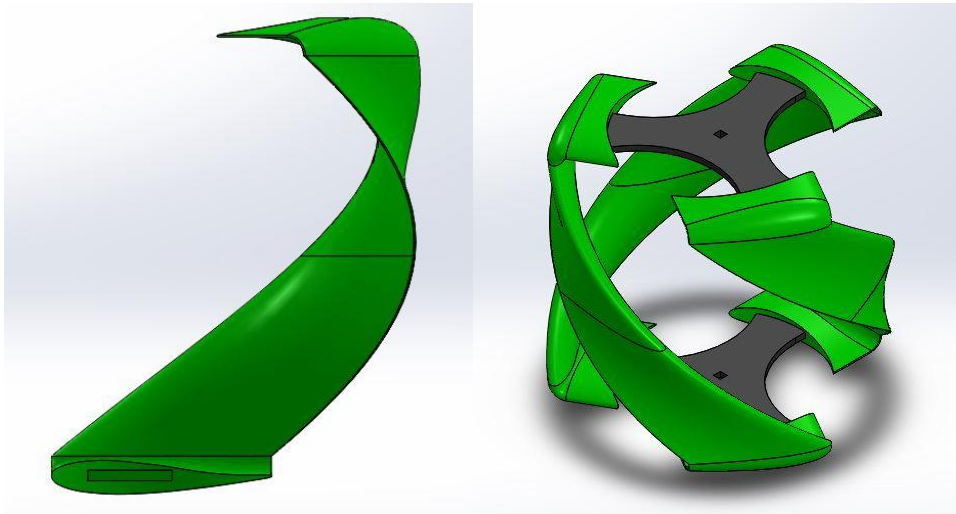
Gorlov Helical Turbine and Blade SolidWorks Model
